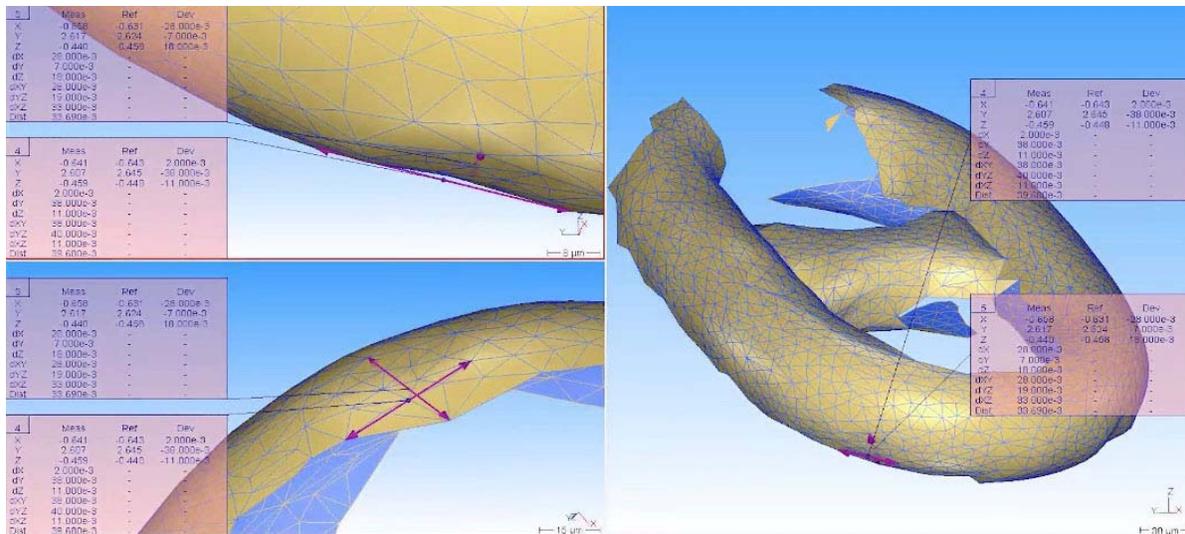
Operational survey and corrosion inspection of metallic components (wear on chain).
